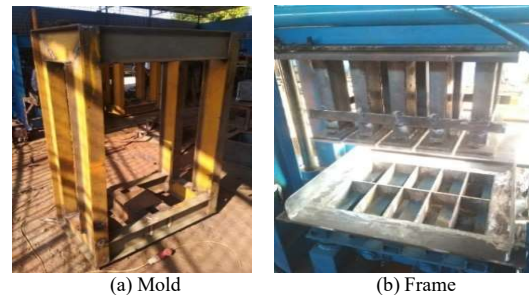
Mold and Frame Parts on Hydraulic Block Paving Machines
